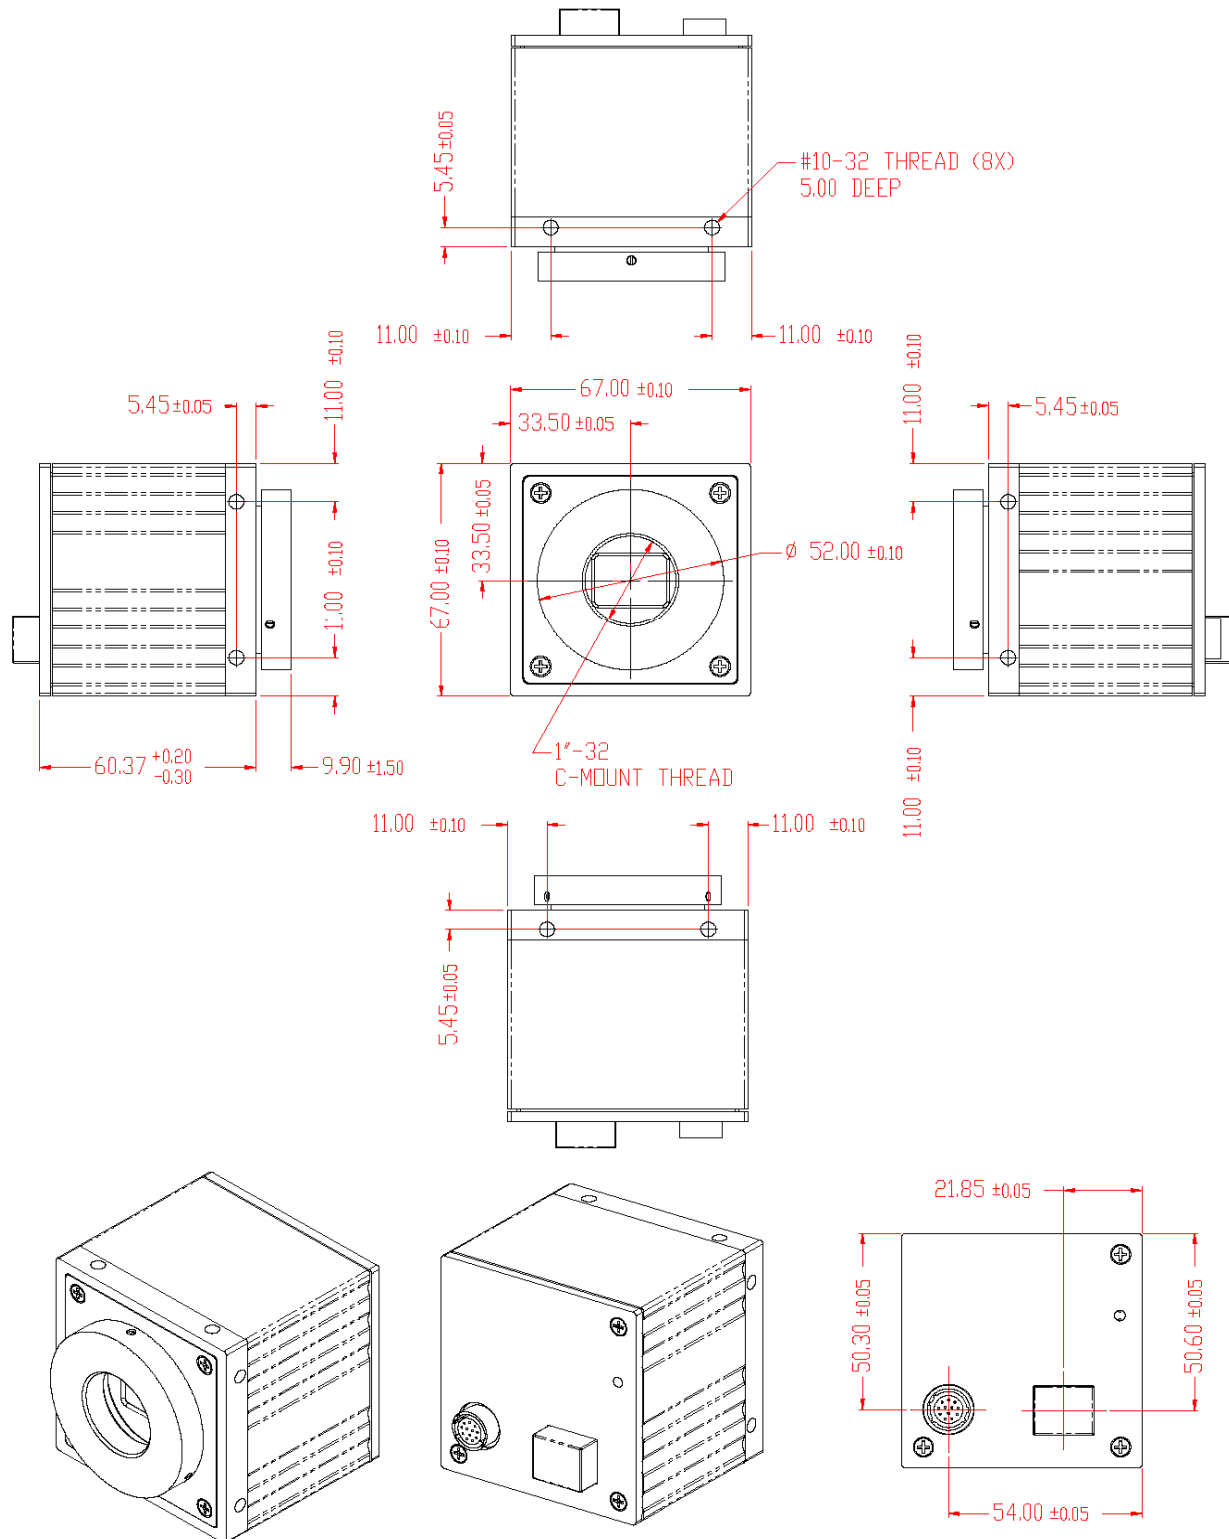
IPX-2M30-G and IPX-2M30H-G Dimensional Drawings
